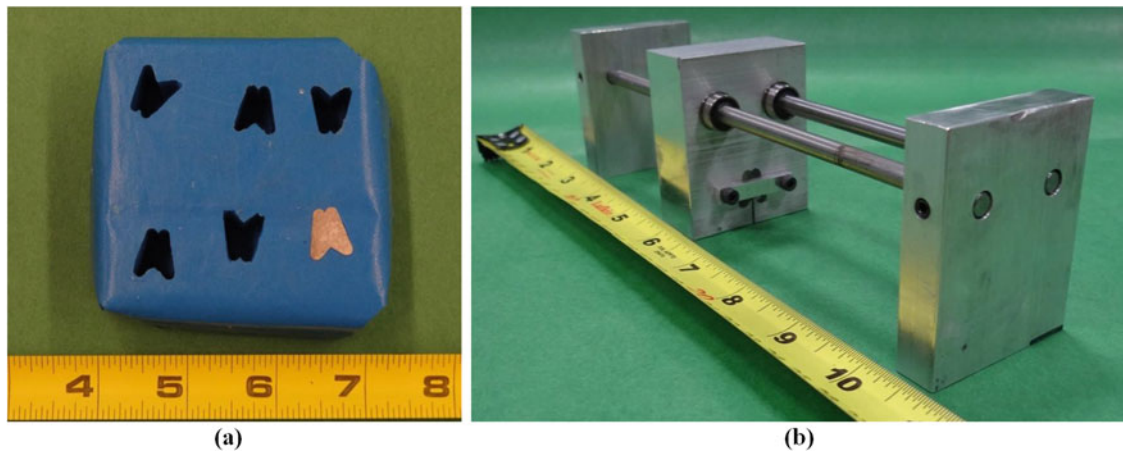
(a) Silicon mold used to mold the epoxy and (b) custom notching fixture
